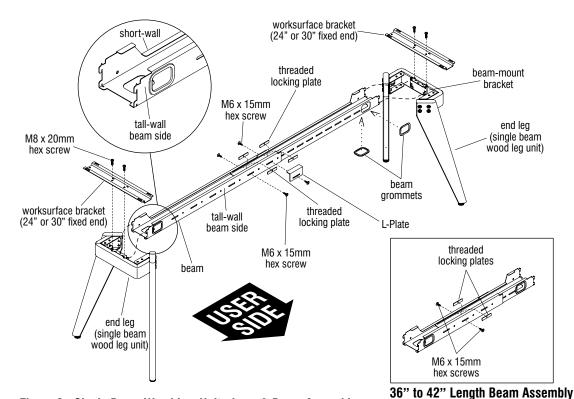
Single Beam Wood Leg Unit - Legs & Beam Assembly
